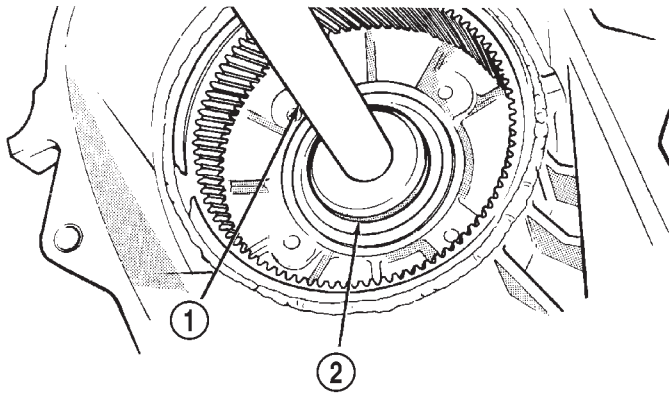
Output Shaft Rear Bearing Installation Depth
